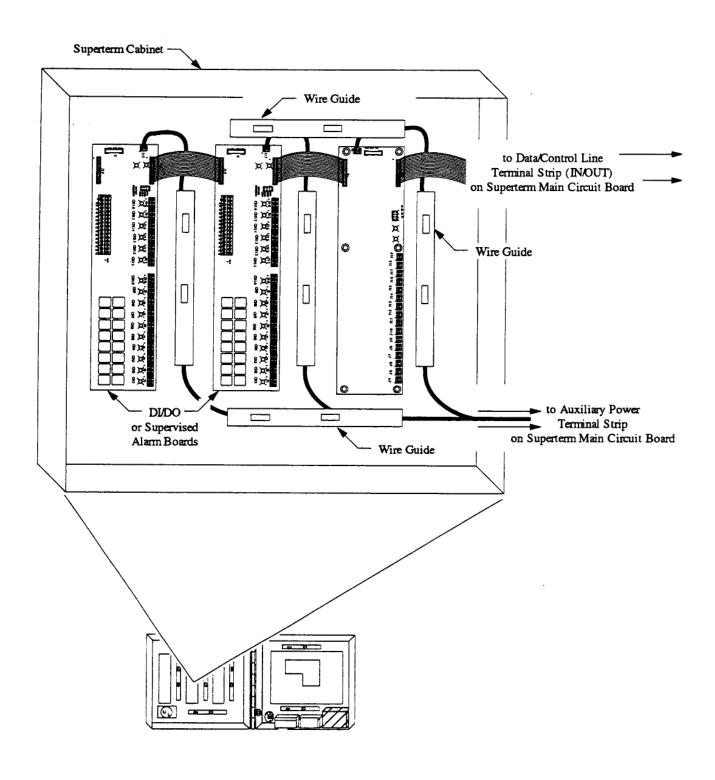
Expansion Input/Output Board Layout in Superterm Cabinet
